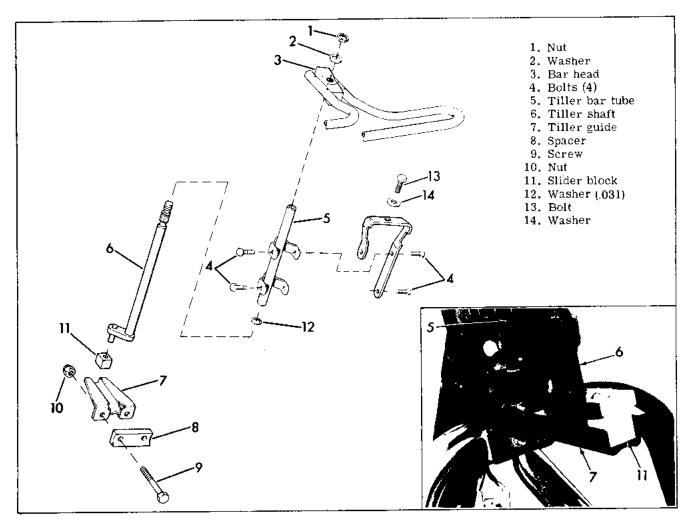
F-69A. Tiller Steering (1974 & Later) - Exploded View
